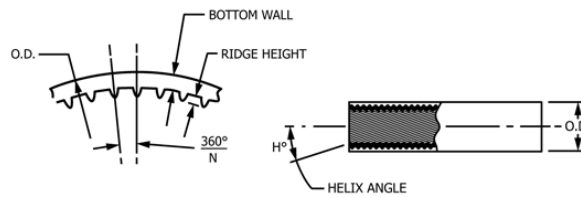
Inside Diameter Enhanced Tube Nomenclature
